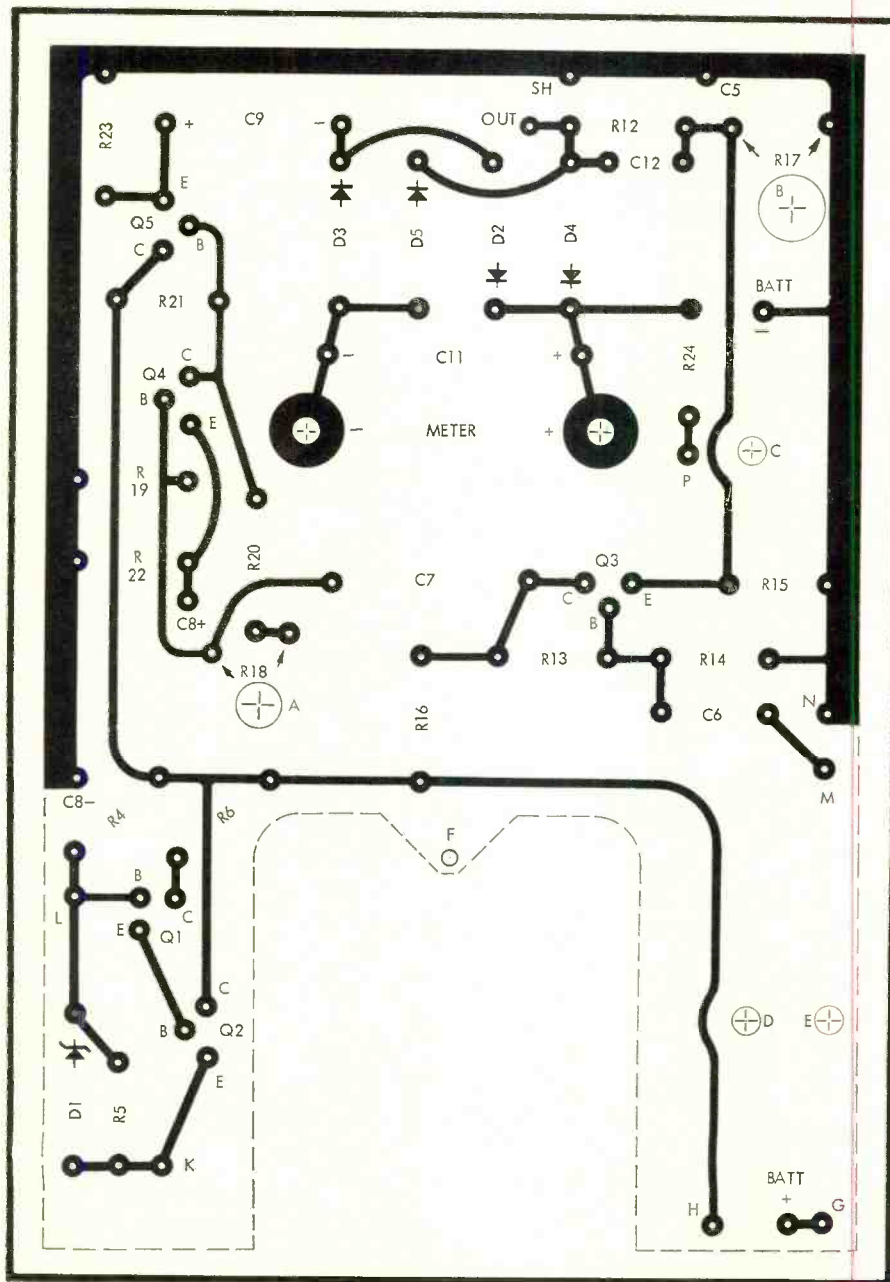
Full-size diagram of printed circuit board. This may be used directly to make the board, or as a guide for parts placement on Vector board, if one is used.
